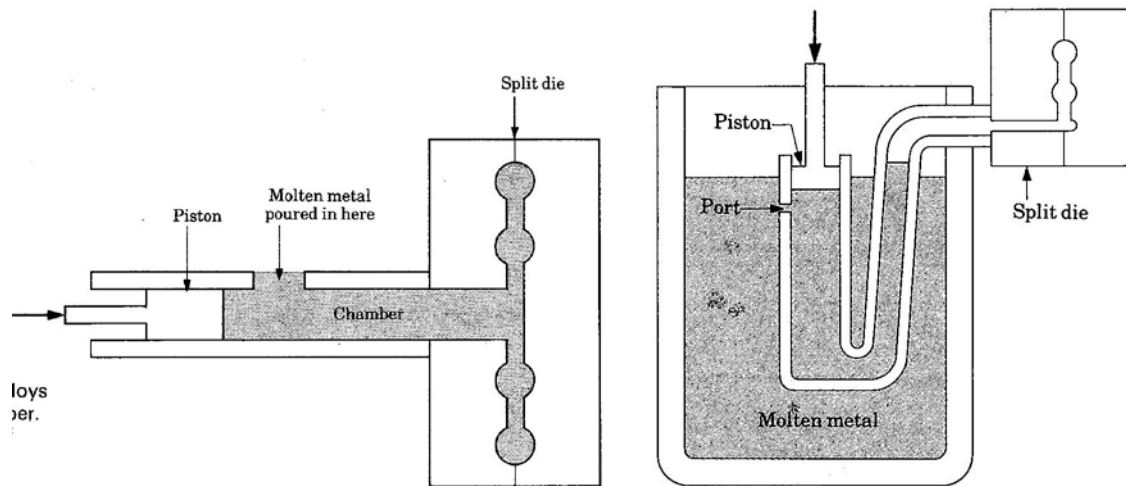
Schematic diagrams: *Left:* A cold-chamber die casting machine. *Right:* A hot-chamber die casting machine.
